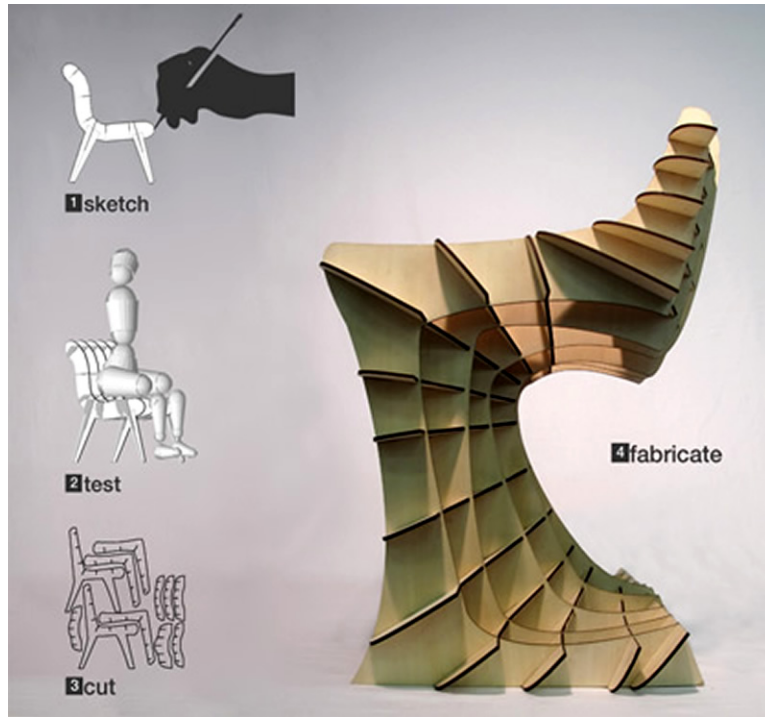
Sketch Chair allows designers to design chairs that can be easily cut and assembled with a CNC machine.
